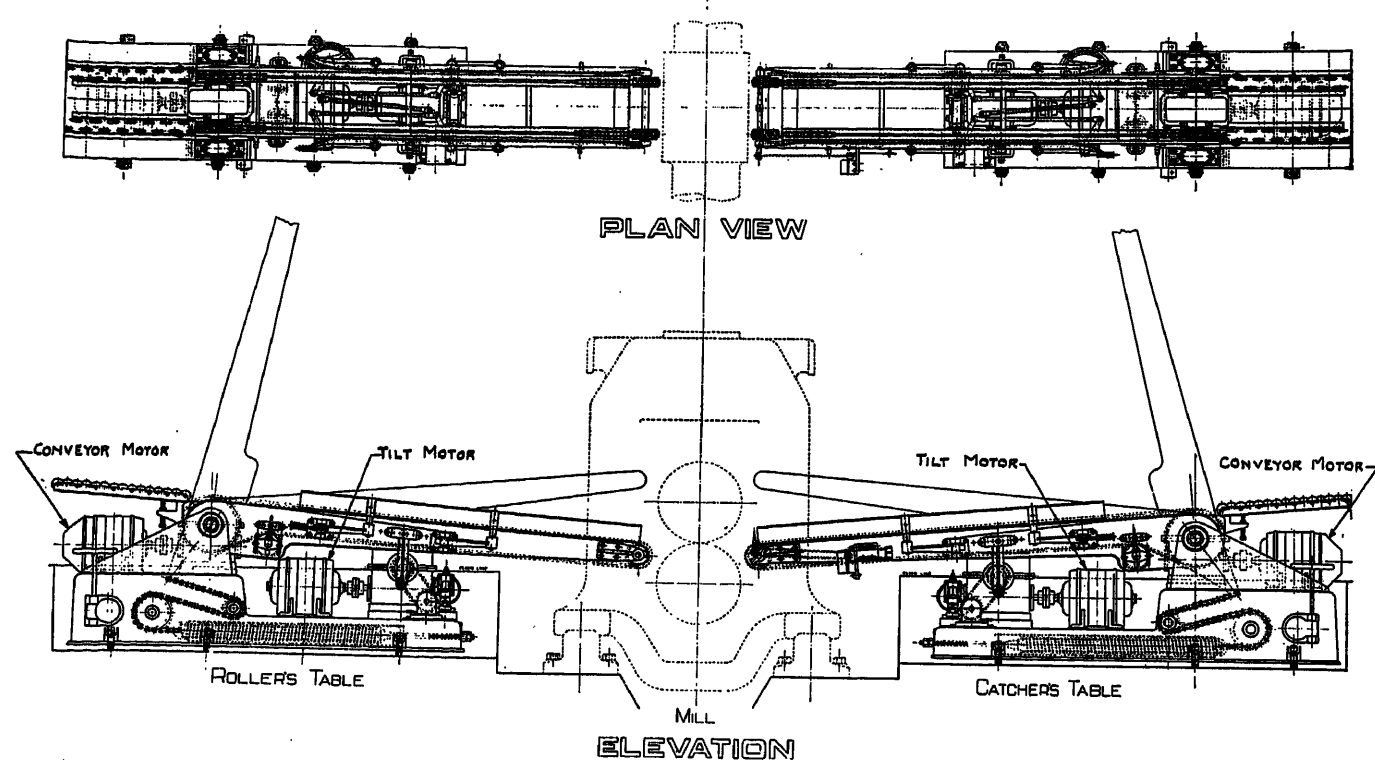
DETAILS OF MECHANISMS AND MOTOR MOUNTING ON ONE MAKE OF AUTOMATIC TABLES USED IN ROLLING SHEET STEEL OR PLATE
